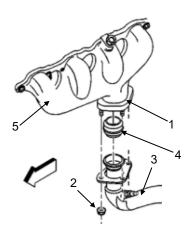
Y-Pipe Assembly (3), Y-Pipe Gasket (4), Exhaust Manifold Heat Shield (5), Exhaust Manifold (1), and Nut (2)
